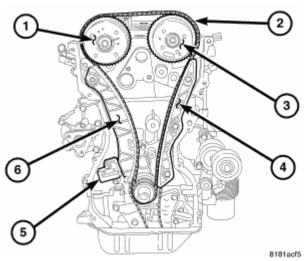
TIMING DRIVE Courtesy of CHRYSLER LLC
